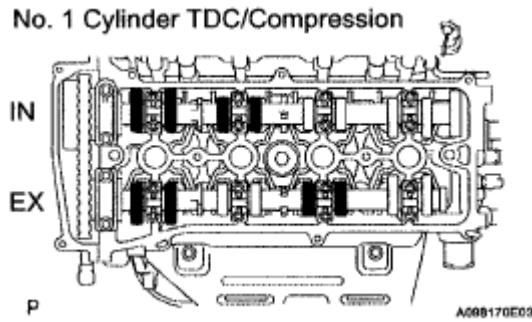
Identifying Valve Position Of Cylinder (No.1)
